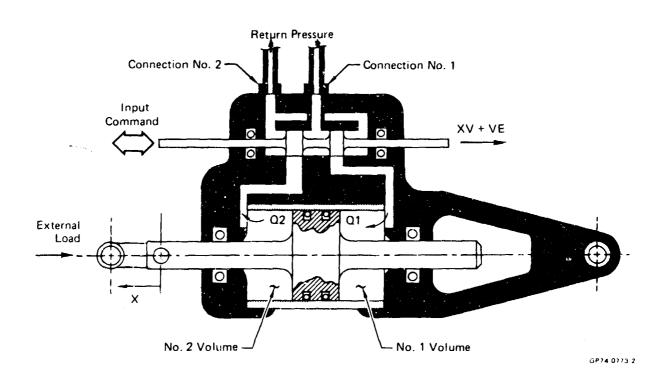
SINGLE PISTON, VALVE CONTROLLED ACTUATOR
